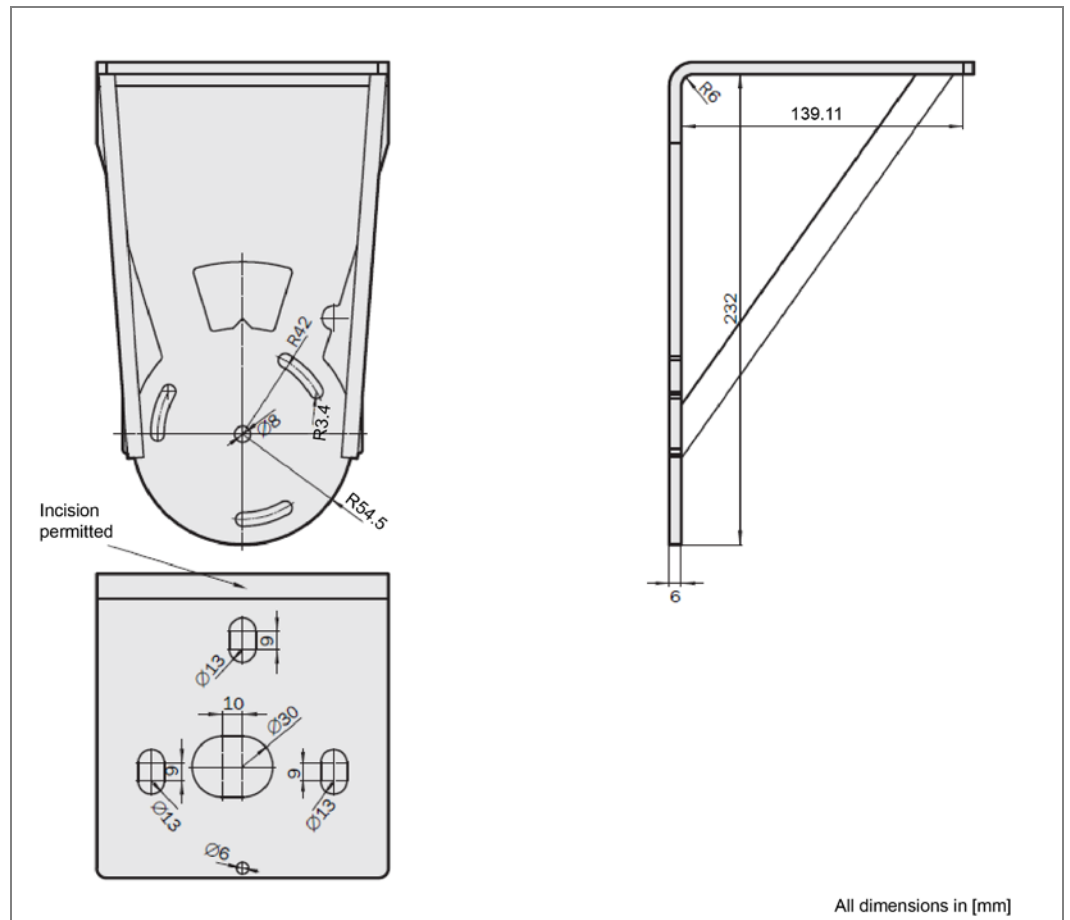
Dimensional drawing of the mounting bracket of the mounting adapter
